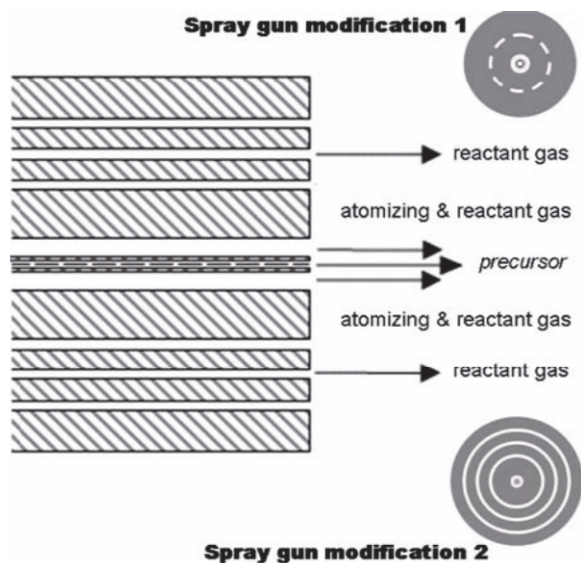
Modified spray gun design by Keskinen.⁸
